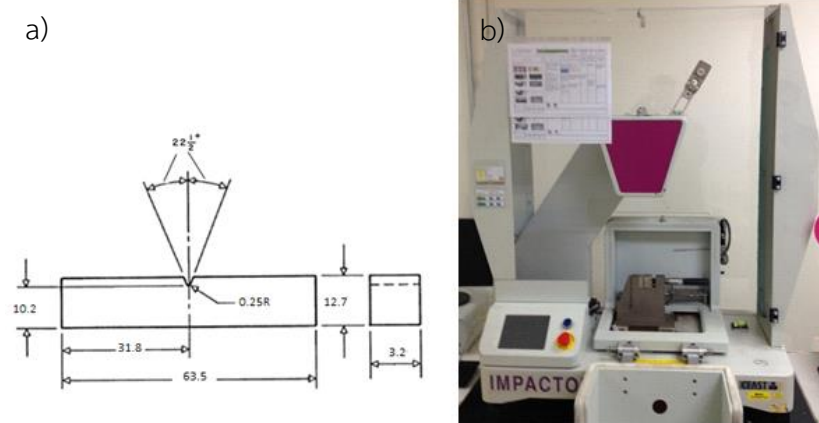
a) Dimension of impact tested specimen and b) impact testing machine (IMPACTOR II, CEAST, Pianezza, Italy)
